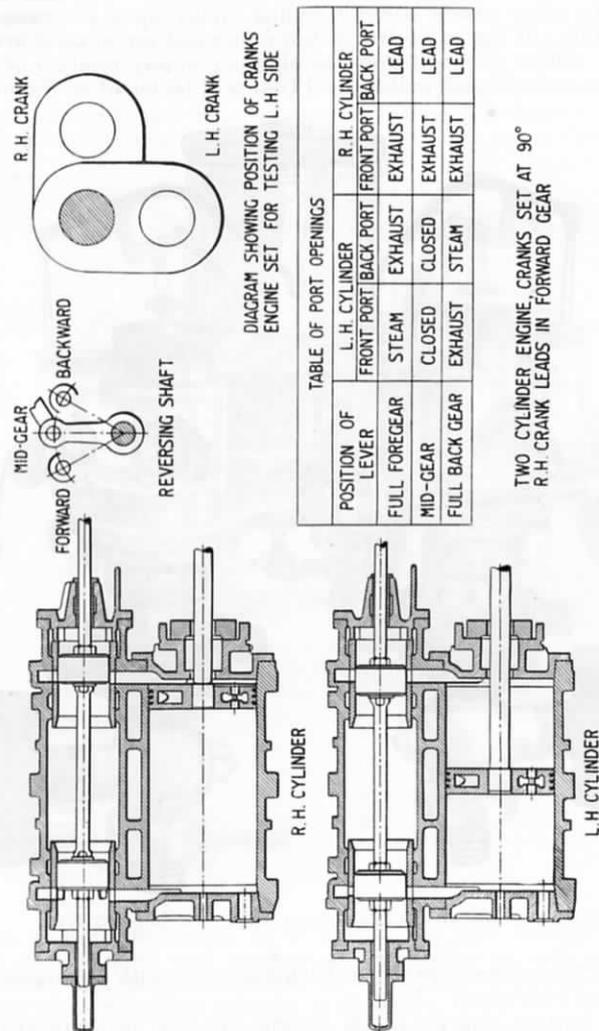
METHOD OF TESTING VALVES AND PISTONS, L.M.S.R.
